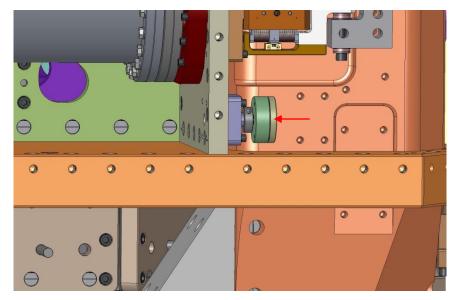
Horizontal Sensor Target must be retracted before Sensor Assembly is installed.
